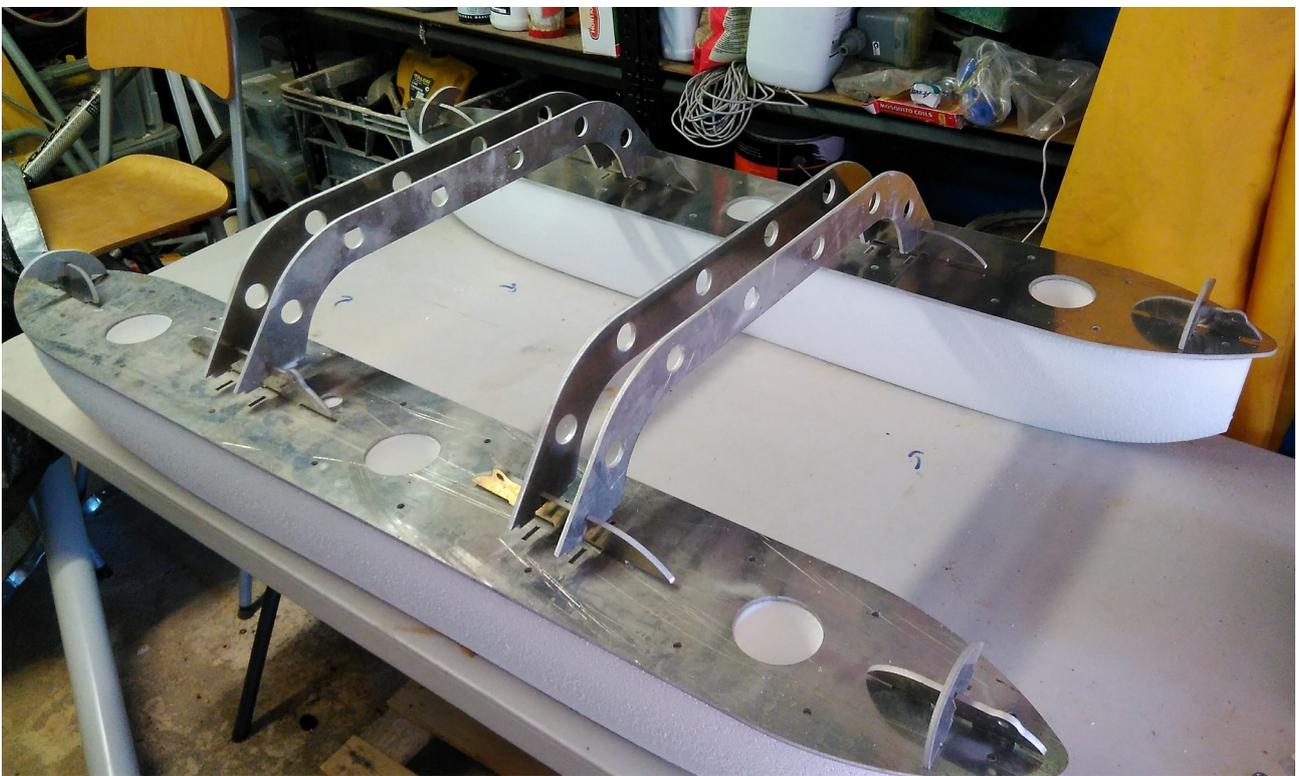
Structural bridge - raw CNC cut plates pre-assembly
